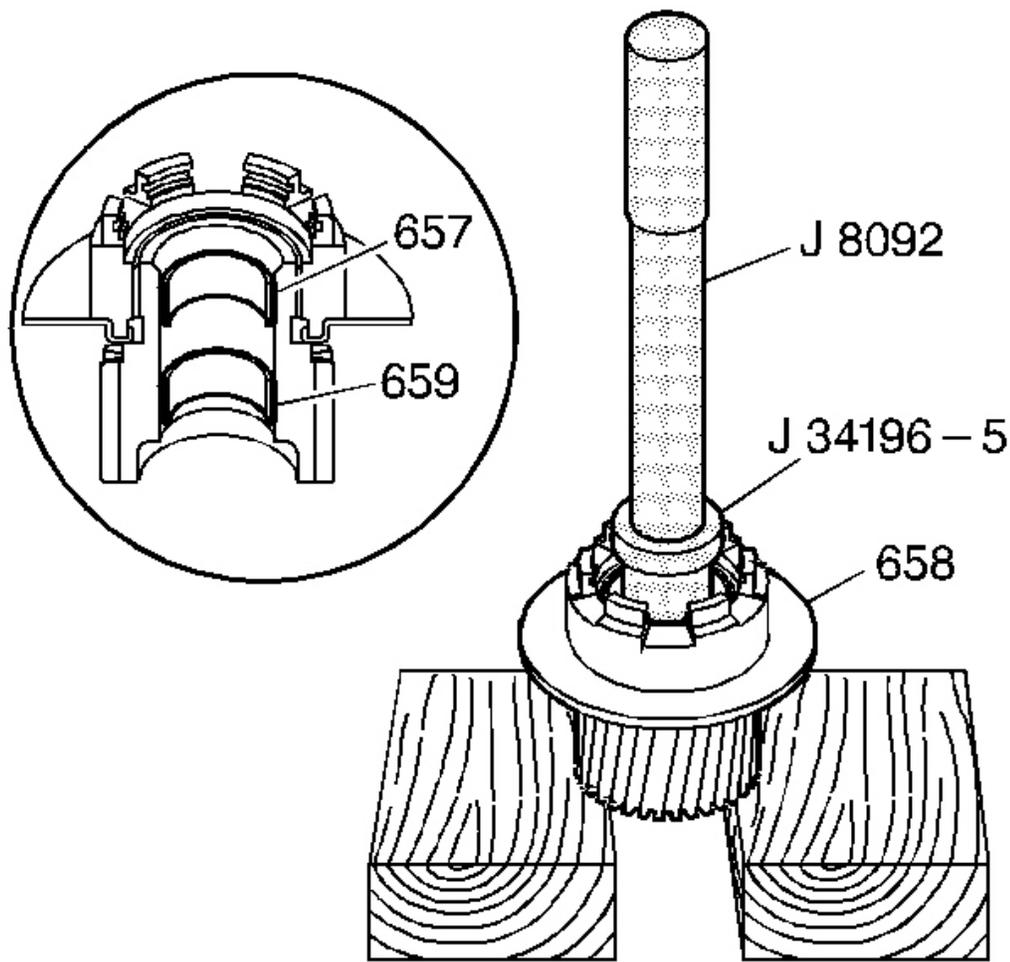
Input Sun Gear Front Bushing & Rear Bushing
